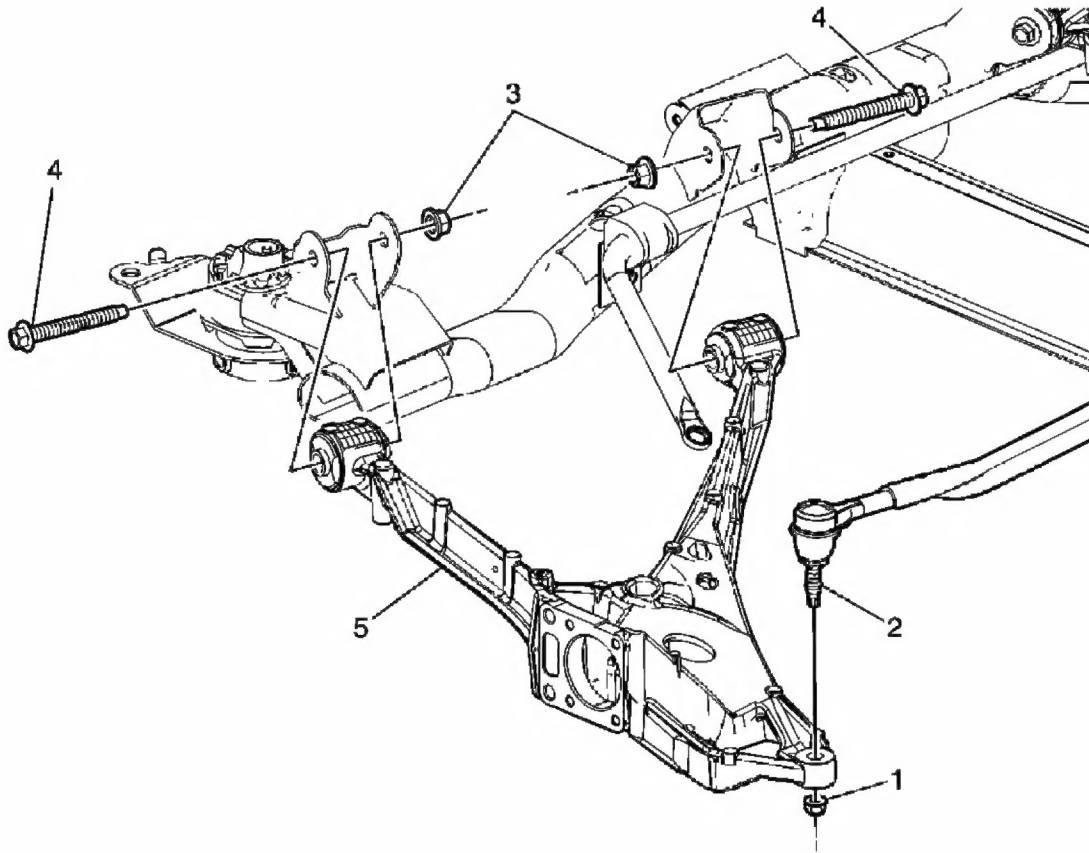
Identifying Rear Axle Lower Control Arm Components
